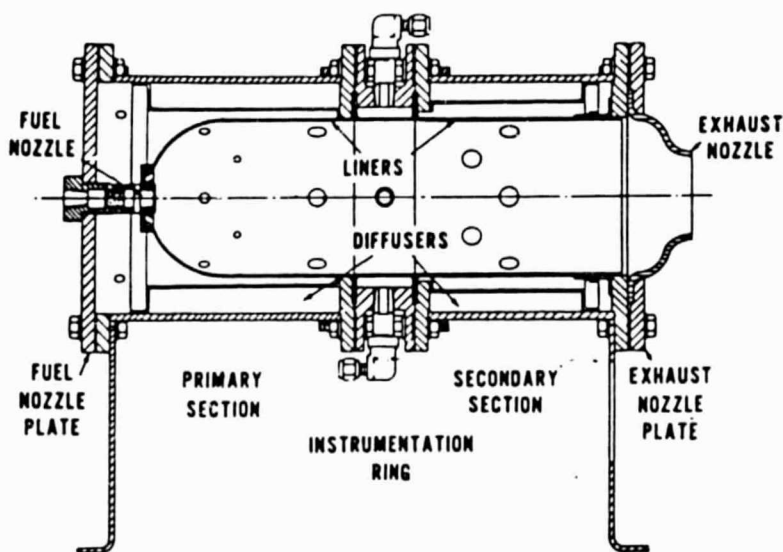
Schematic of Atmospheric Pressure Combustor Rig
